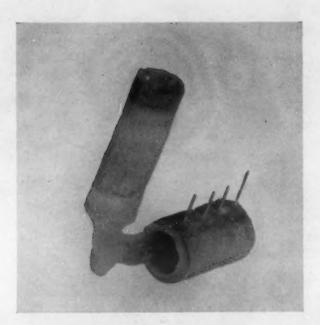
An Hydraulic and Fracture Test Casting.
